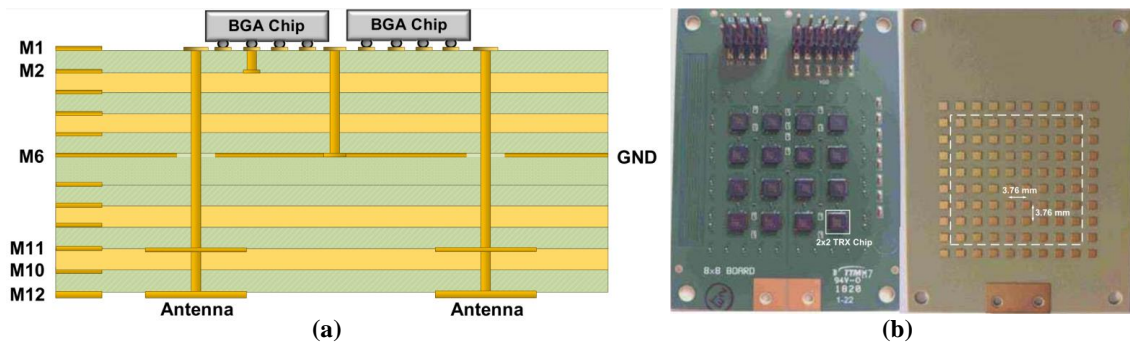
(a) Stack-up of low-cost 12-layer PCB board. (b) Front and back views of 39 GHz 8×8 phased array. [7]
